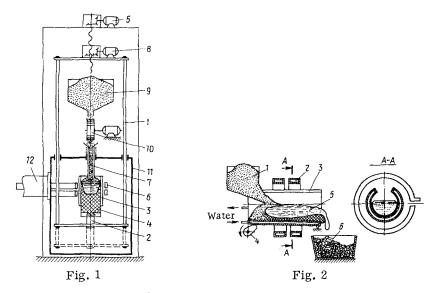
Layout of 60/5.28 IMCC equipment for melting blocks of fused oxides: 8) mechanism for adjustable movement of dummy; 9) bunker with batch; 10) batch doser; 11) working chamber; 12) power supply; remainder of symbols explained in text.
